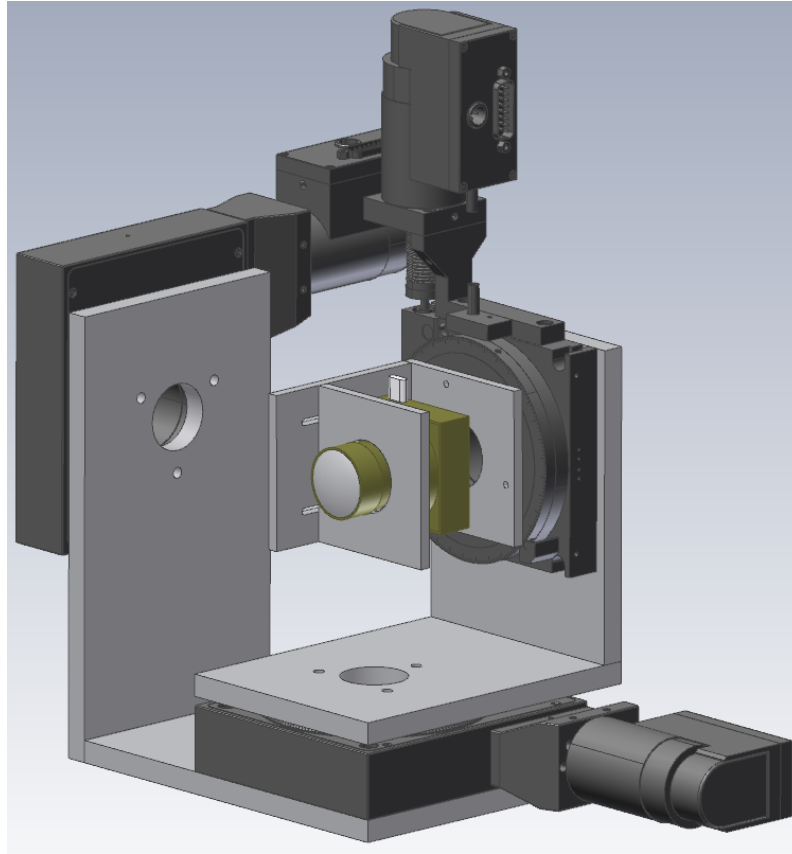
3D drawing of the yaw-pitch-roll assembly for 3 axes sensor manipulation.
